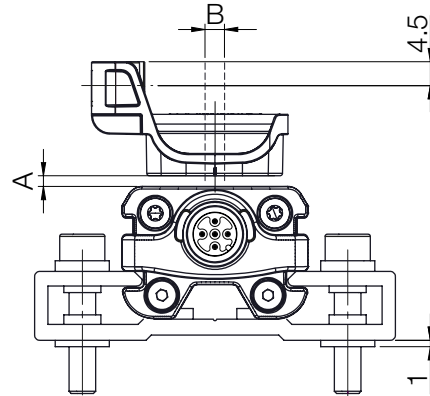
Dimensions and distances with BAM TG-IR-036-B
